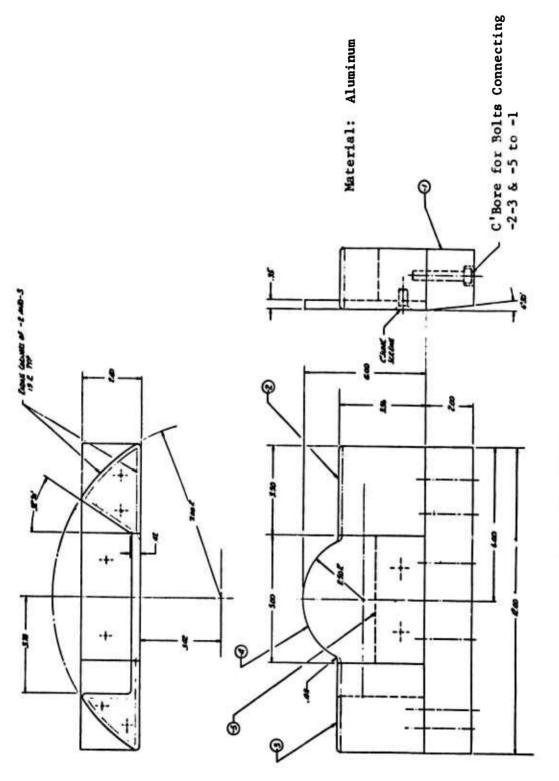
Layup Tool, Internal Bearing Support - Helicopter Transmission Housing (WRD Drawing No. 4713).
